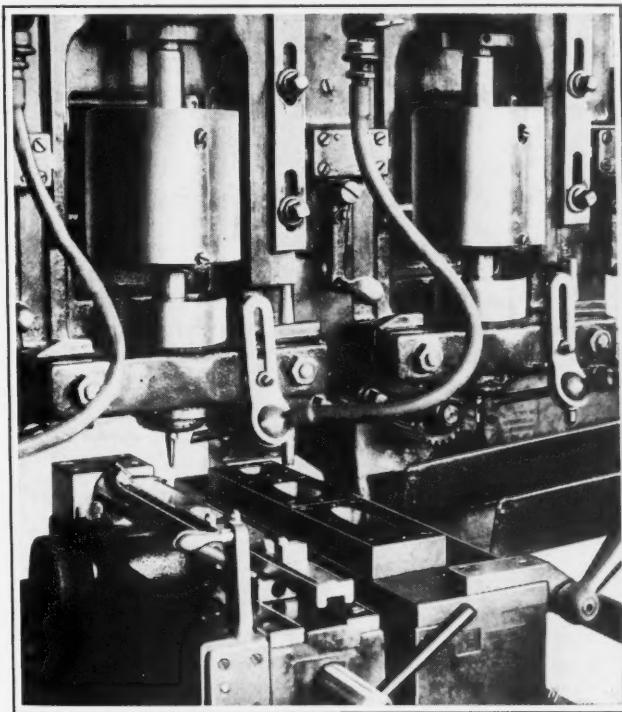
Profiling Fixture equipped with Indexing Slide for locating Three Different Formers in the Operating Position
